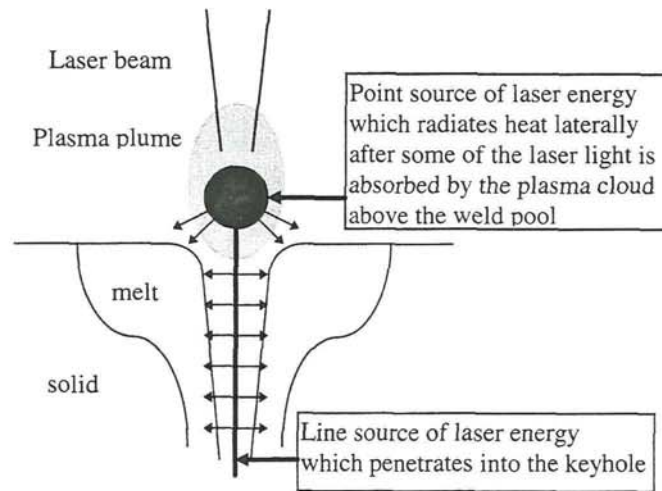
A schematic demonstrating the combined point and line source model of laser welding.
